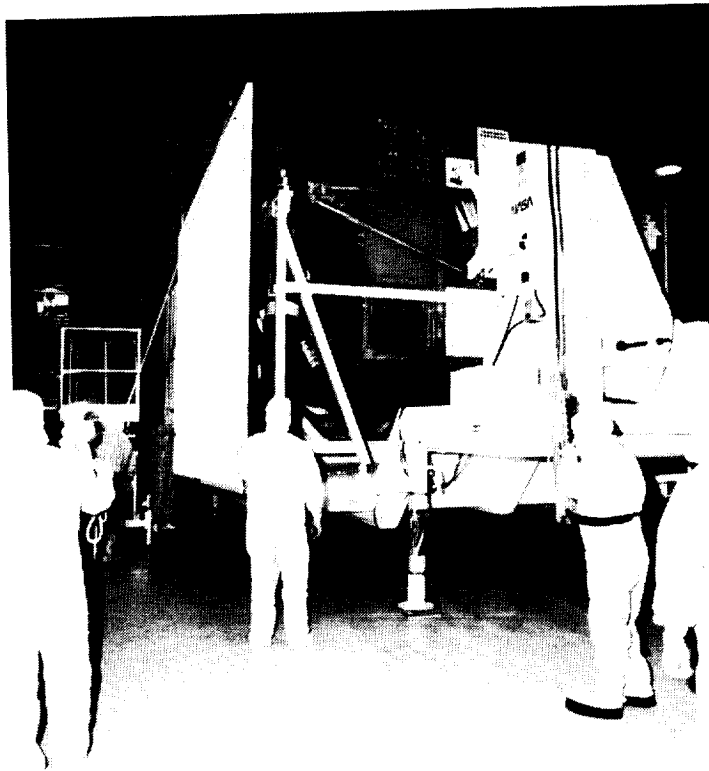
LDEF Assembly and Transportation System (LATS) cover being removed in Spacecraft Assembly and Encapsulation Facility II (SAEF II).
